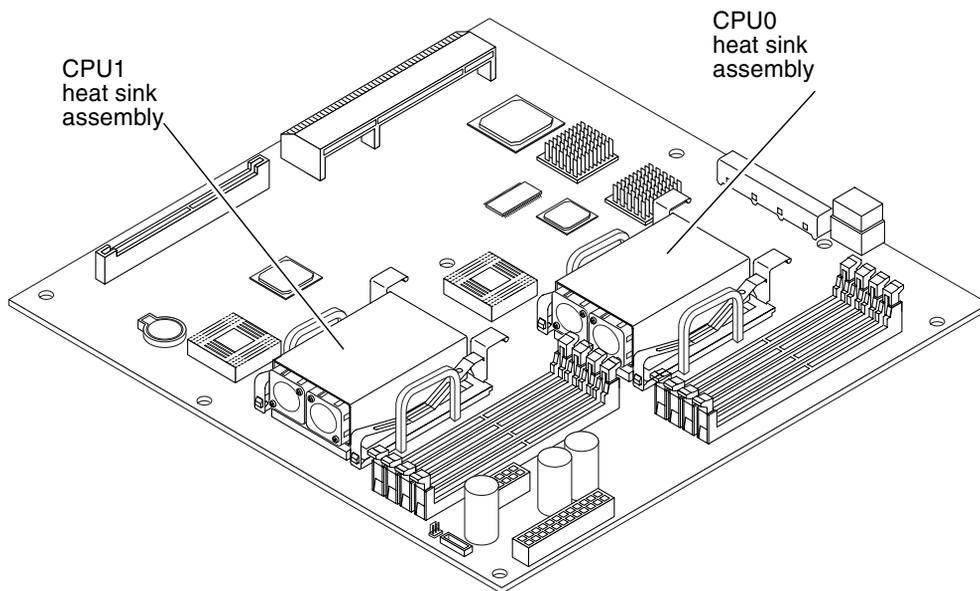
Location of the CPU Heat Sink Assemblies
